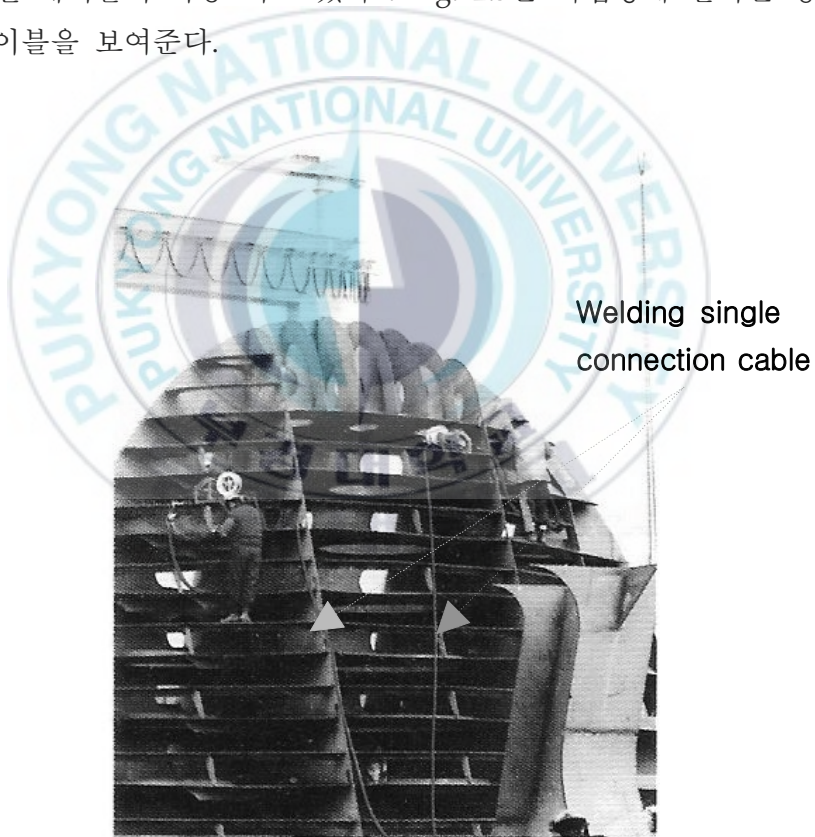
Example for installation of CO₂ welding single connection cable
